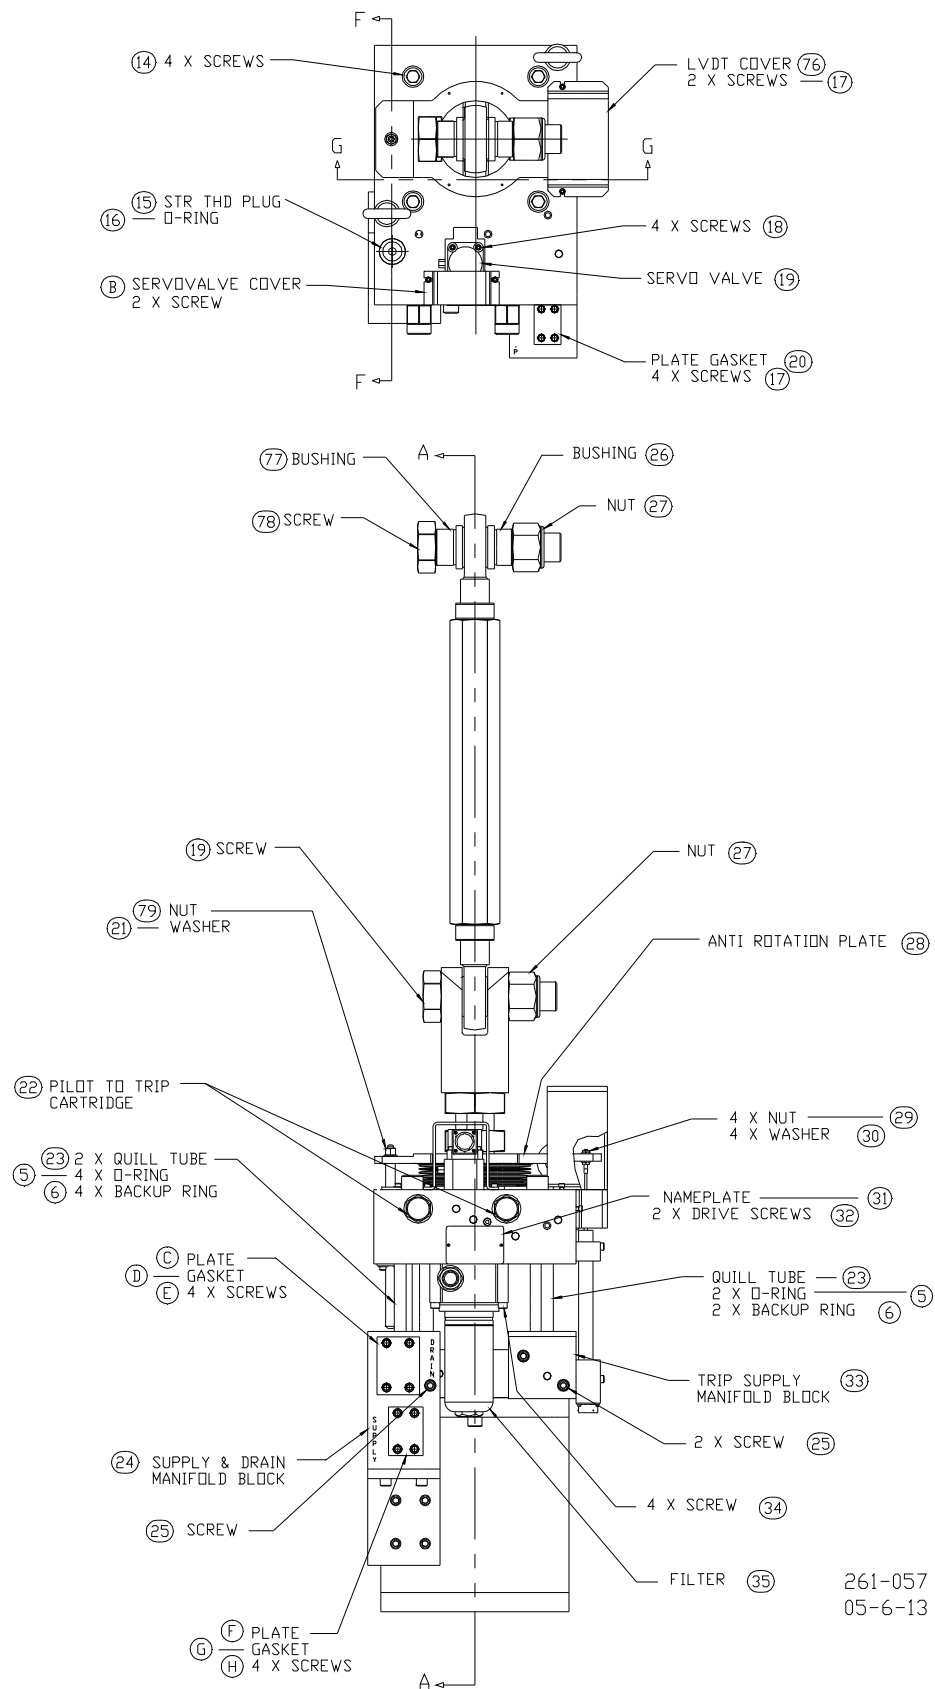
IGV Actuator with Hydraulic Trip (front and top views)
